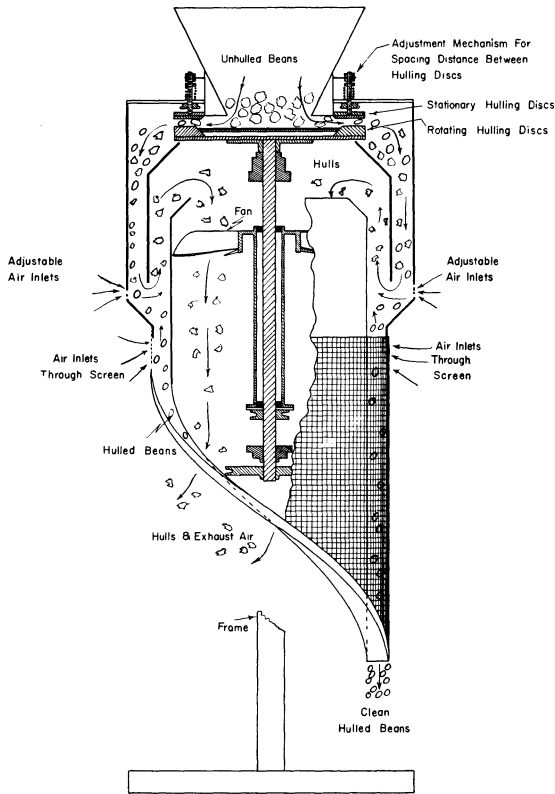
Schematic diagram of huller-cleaner showing path of castor seed through the machine.
